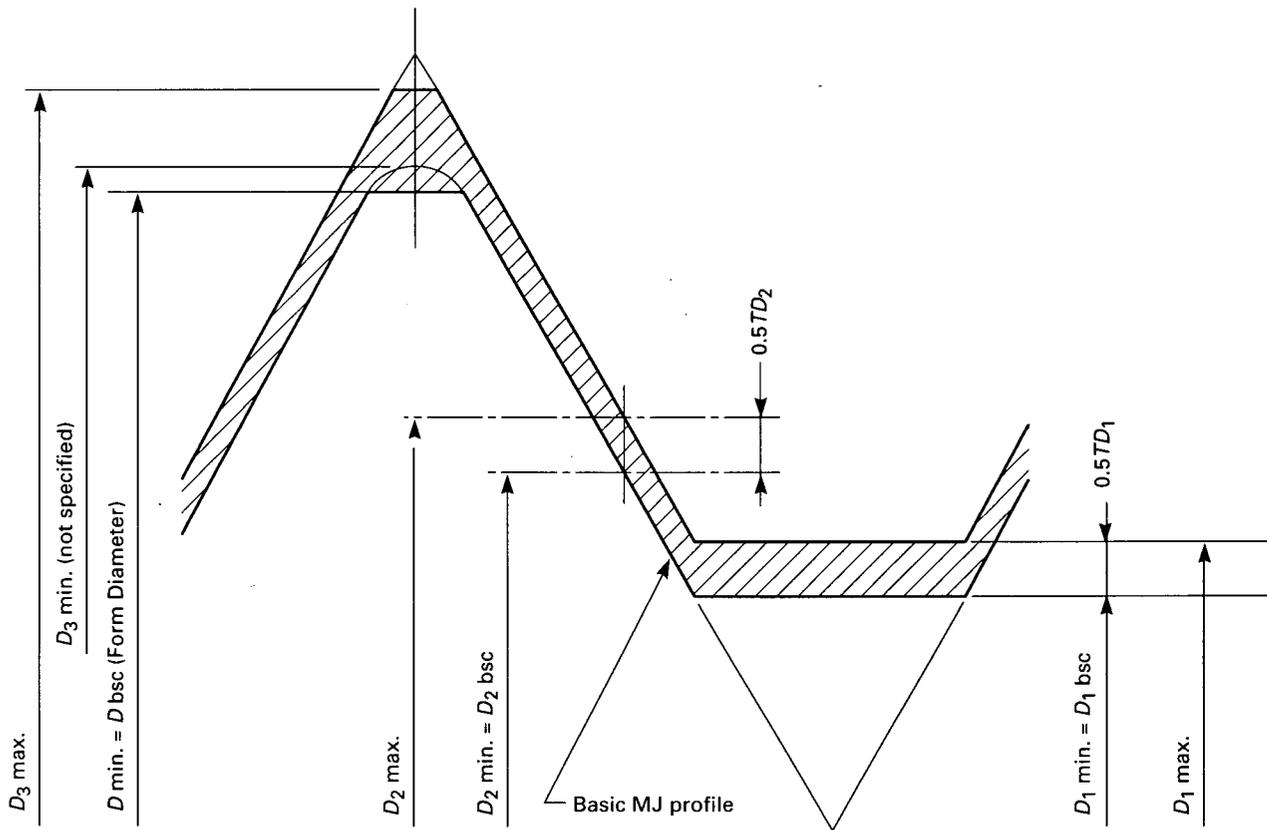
INTERNAL THREAD TOLERANCES
